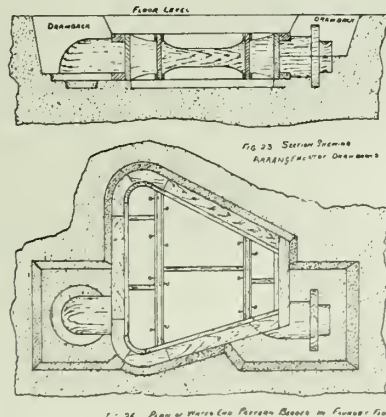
SECTION THROUGH ARRANGEMENT OF DRAWBACKS
